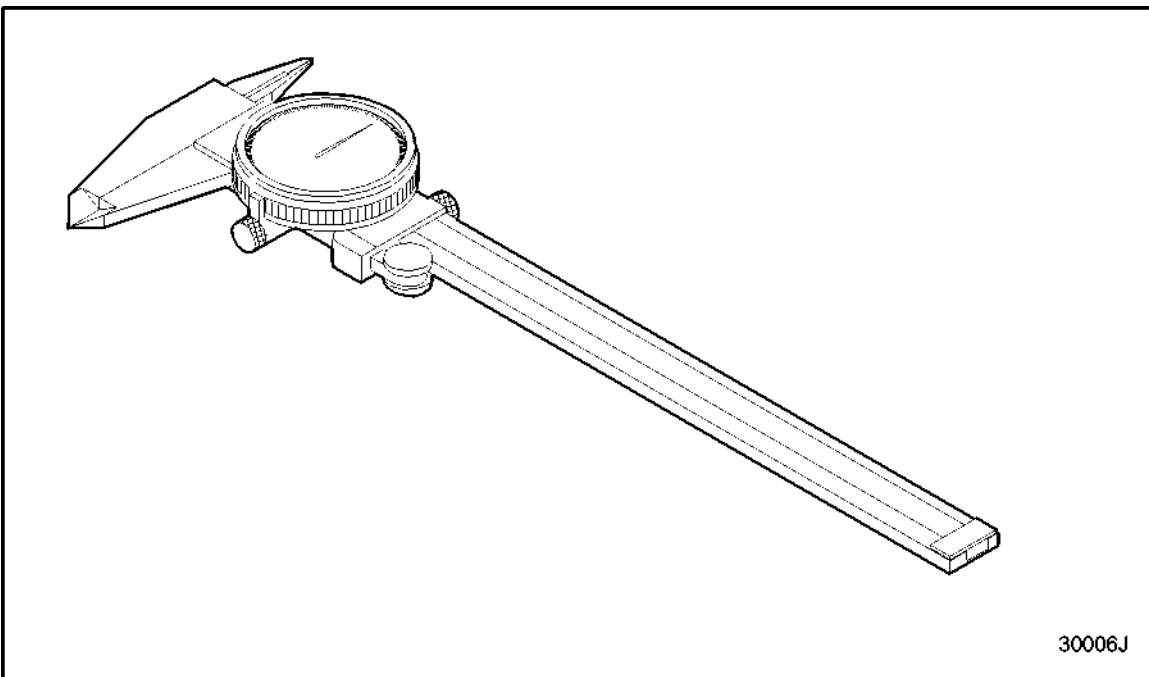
Caliper (0-6" MM) Vernier Type,J 26900-5
